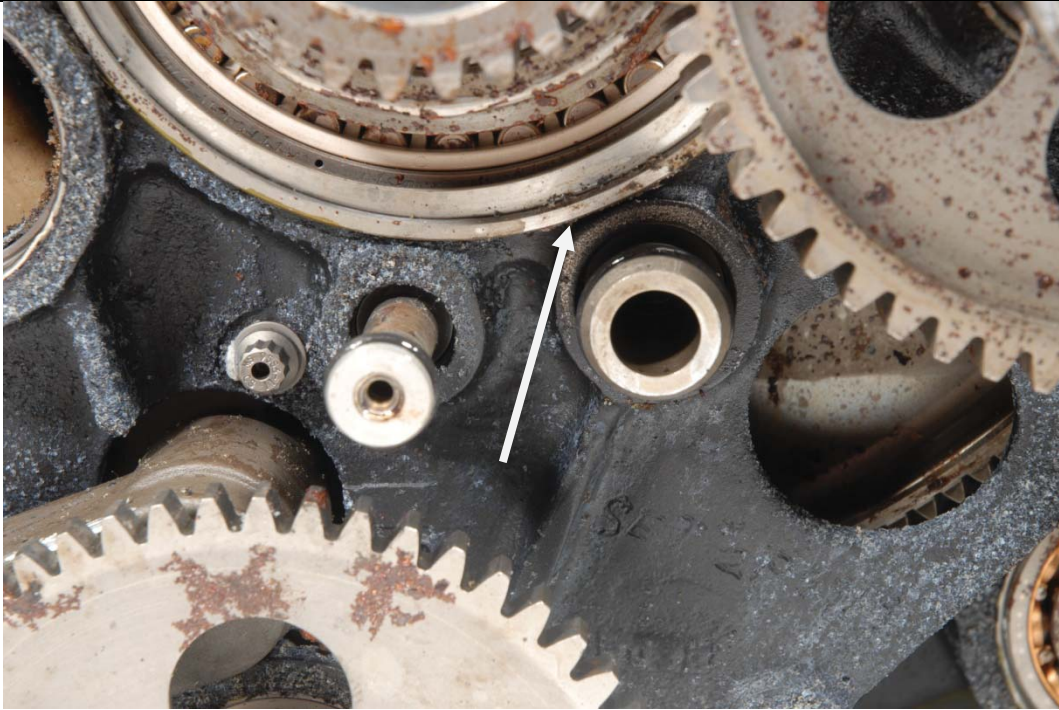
P-79297C, Interior (oil-wetted) Surfaces of the Gearcase Housing
